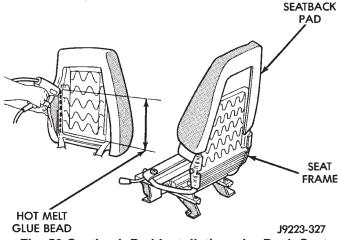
Seatback Pad Installation—Lo-Back Seat
